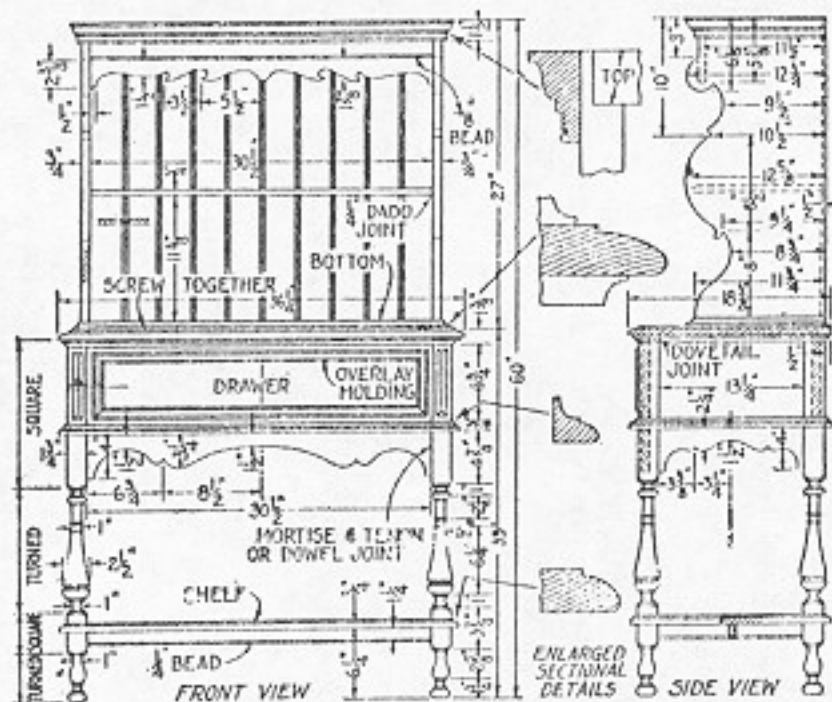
Front and side views of the dresser, and details of the moldings. The upper and lower sections are assembled separately.
